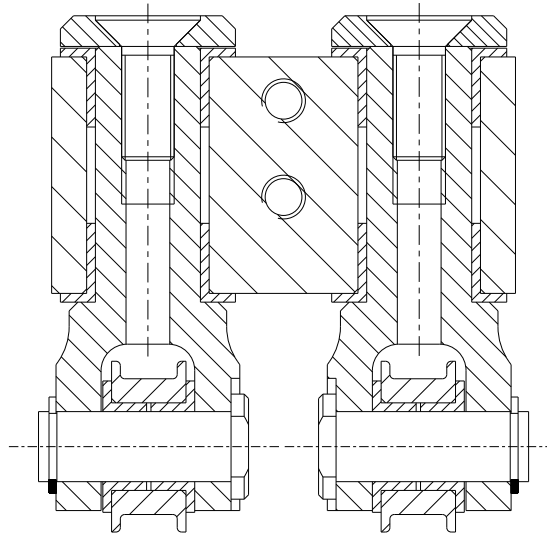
Cable attachments with revolute joints designed for the CORHDA EE.
